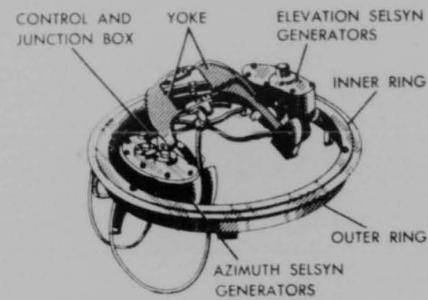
Yoke Assembly Mounted on Sighting Station.
